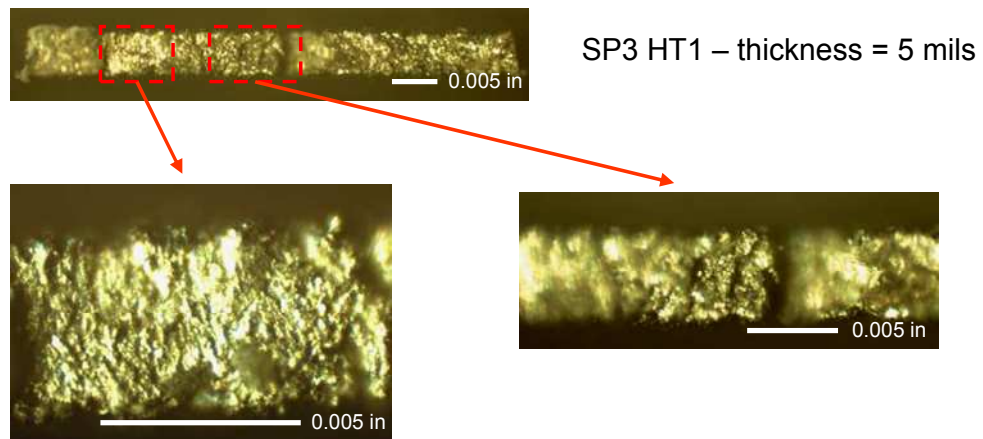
Optical fractography for fatigue test specimen SP3 HT#1.
